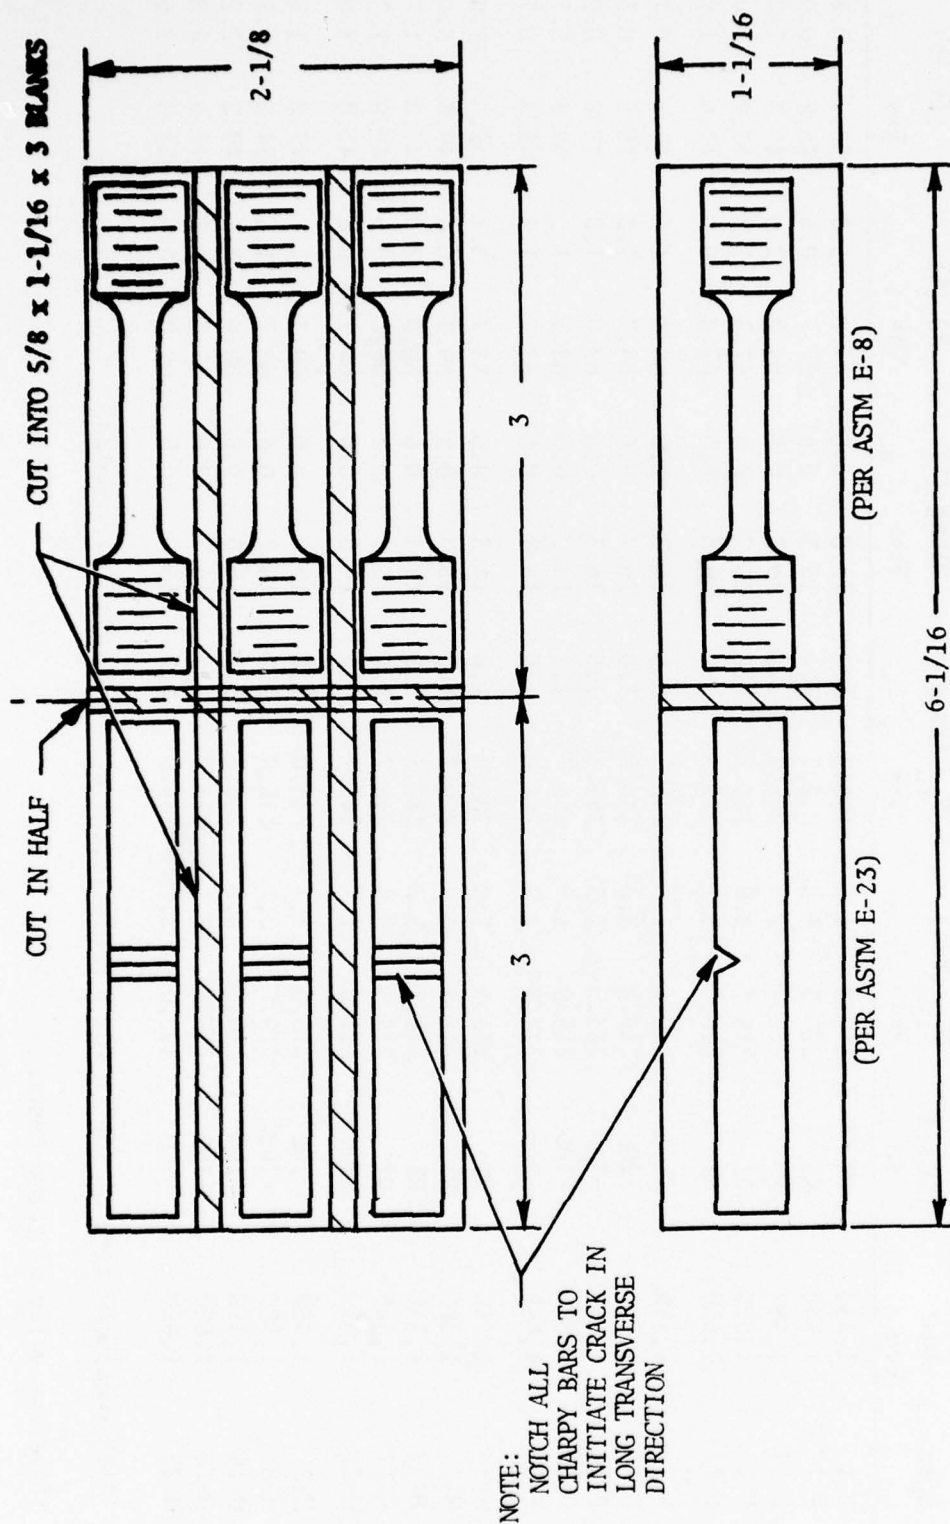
Sectioning and Machining of AF1410 Specimens for Mechanical Testing
